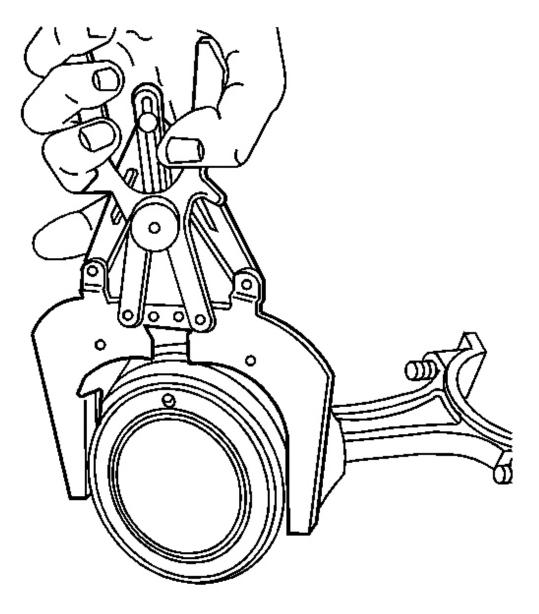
View Of Piston Rings & Piston Expander Courtesy of GENERAL MOTORS CORP. 2004 ENGINE Engine Mechanical - 4.2L - Ascender
